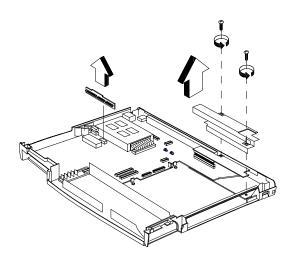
Removing the Keyboard/Touchpad Board and DC-DC Converter Board Cover
